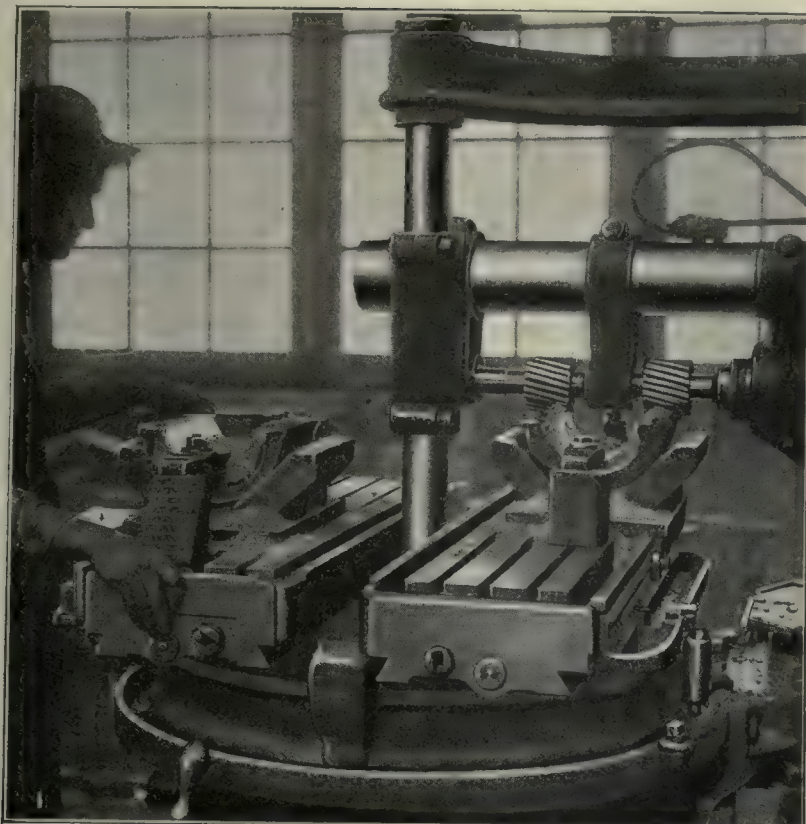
MILLING DIESEL ENGINE BEARINGS. FIG. 2—TURNING THE OUTSIDE
